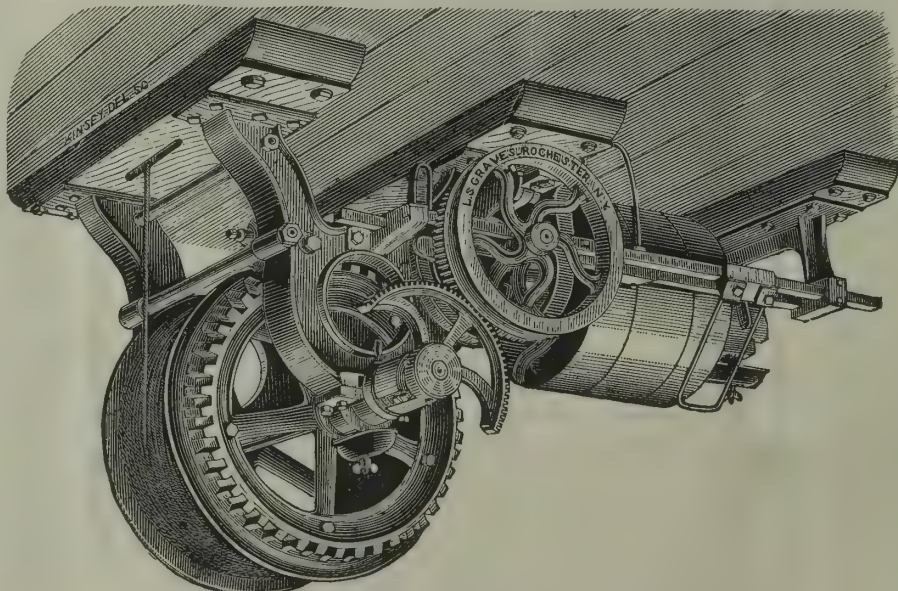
SCREW POWER HOISTING MACHINE, No. 2.
